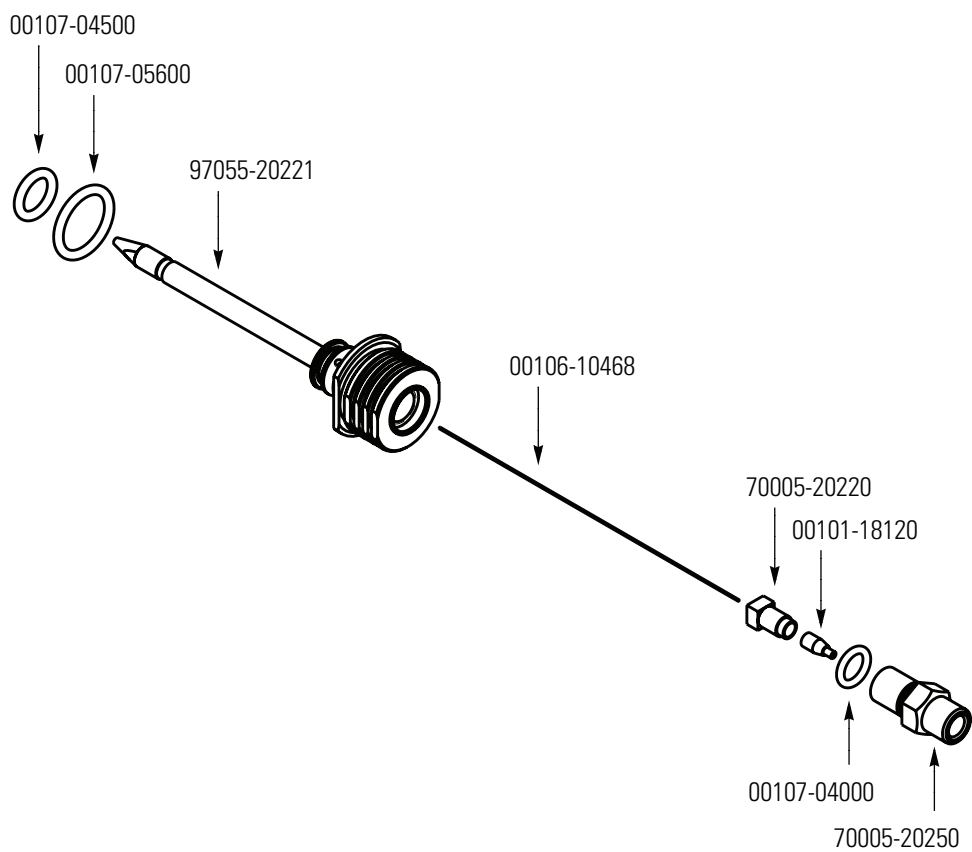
APCI probe nozzle assembly (P/N 97055-60089)
